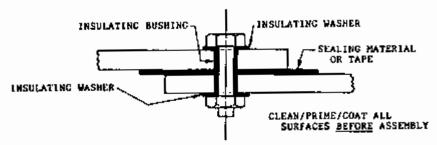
PROPER DESIGN OF A DISSIMILAR METAL JOINT
